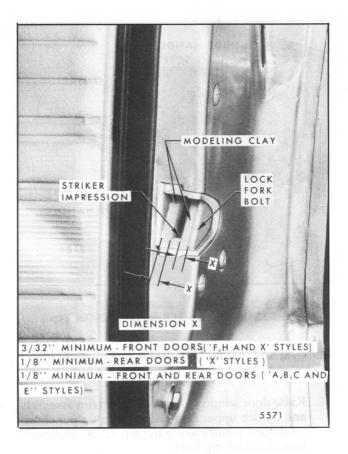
Lock-to-Striker Fore and Aft Adjustment
